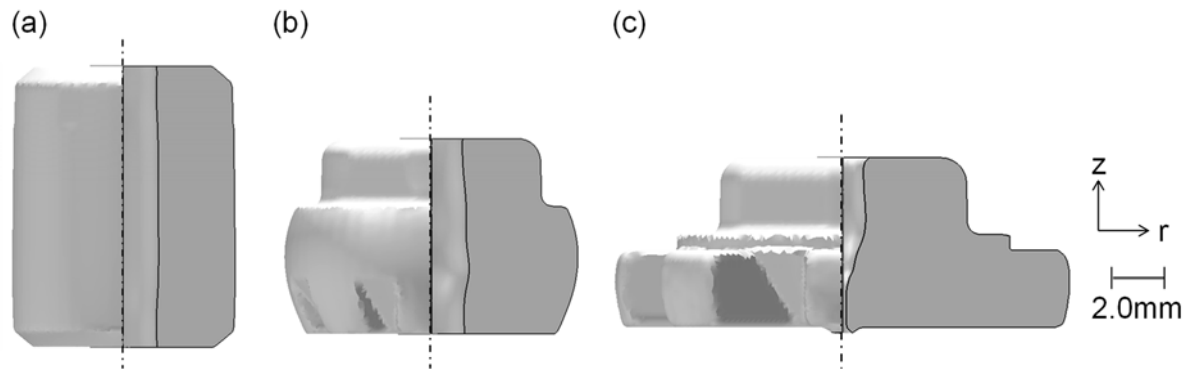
Deformation behavior of hollow cylindrical workpiece in lateral extrusion with gear shape (left half: appearance, right half: section, finite element analysis): (a) axial stroke $s = 0.7$ mm, (b) $s = 4.8$ mm, (c) $s = 6.7$ mm.
